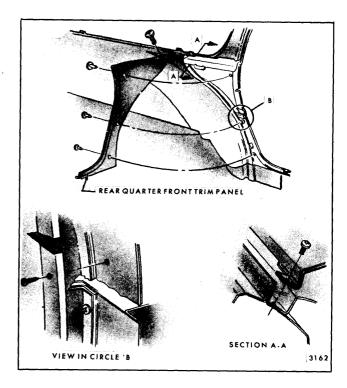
Rear Quarter Front Trim Panel "A" Station Wagon
